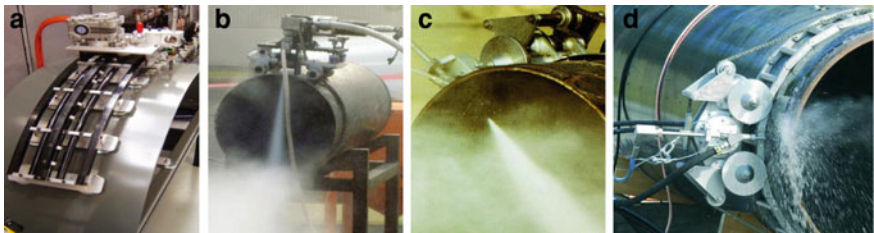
a, b, c, d Steel–concrete cutting equipment. a Magnetic-belt fixture, b chain drive cutting unit, c chain-belt drive, jet exit, d chain-belt drive, injector-nozzle assembly
